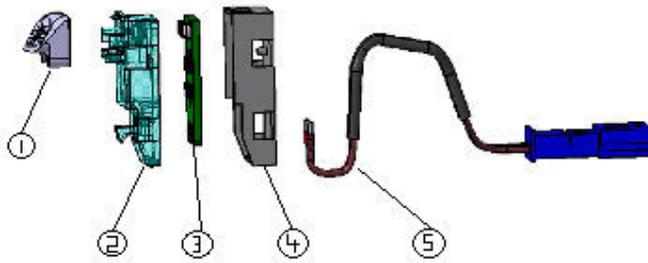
Exploded view of a typical ambient lighting assembly consisting of lens (1), cap with integrated light guide (2), electronics pcb with light source (3), housing (4) and cable assembly (5)
